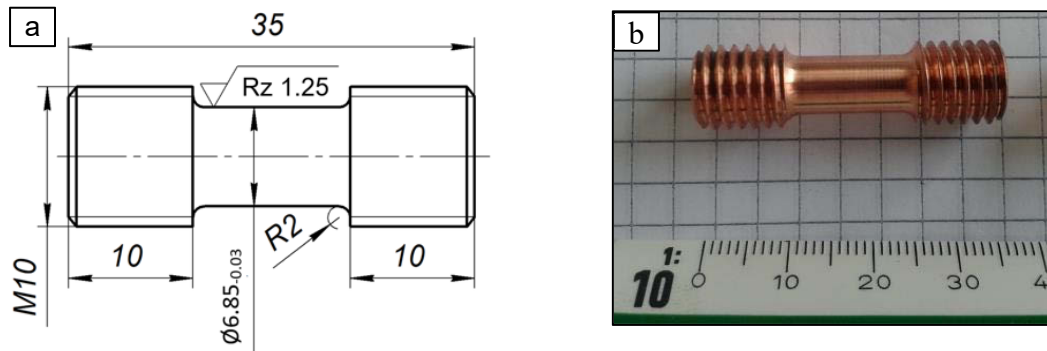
Schematic drawing of the tensile test sample (a) and photo of the sample after machining (b). Dimensions are given in millimeters.
